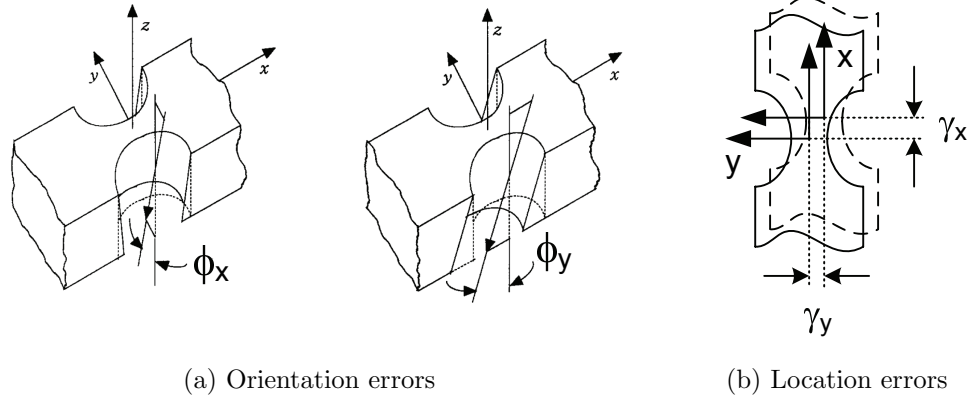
Errors induced by machining tolerances in flexure joint axis geometry.
